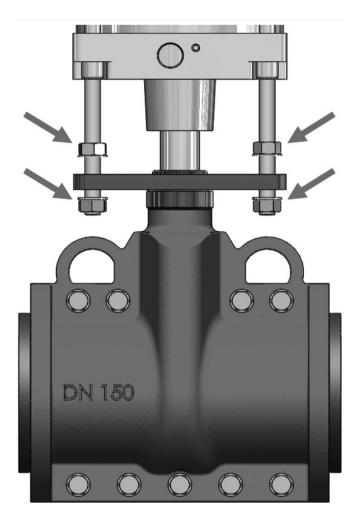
Pneumatic actuator lower and upper fastener nuts.
